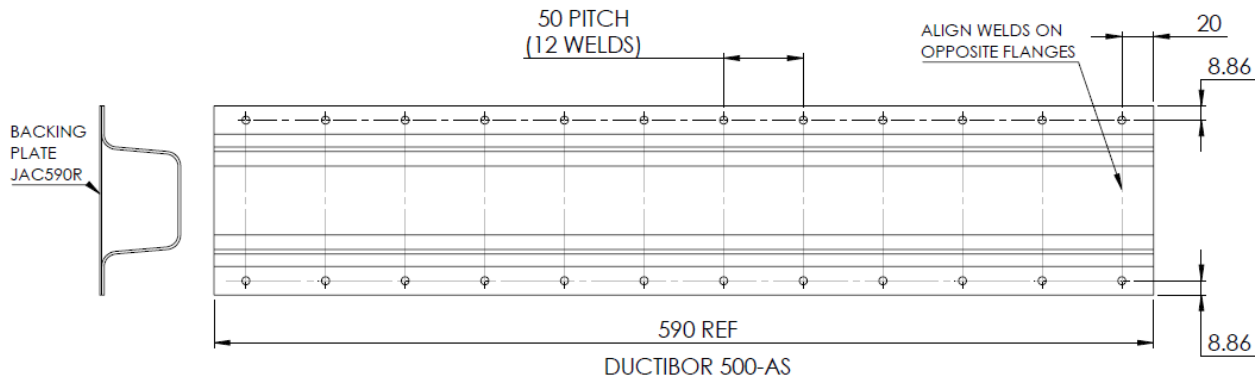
Spot welding of channels to backing plates to create side impact beam specimens. Dimensions in millimeters.
